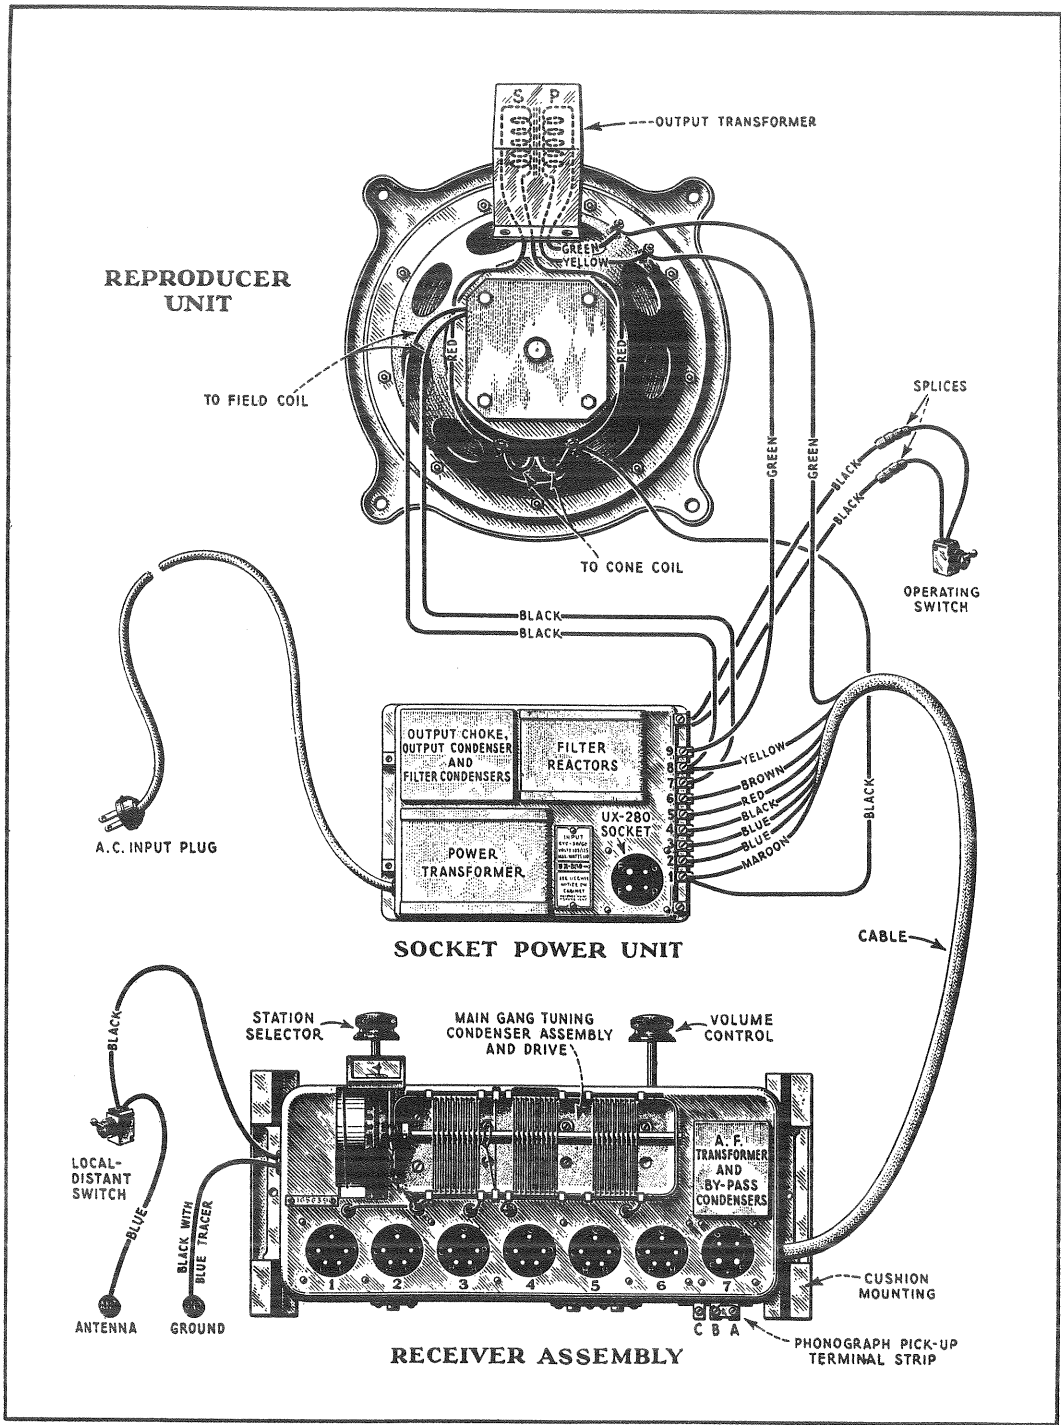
Radiola 66 cable connections, socket contacts, reproducer unit, socket power unit and receiver assembly
